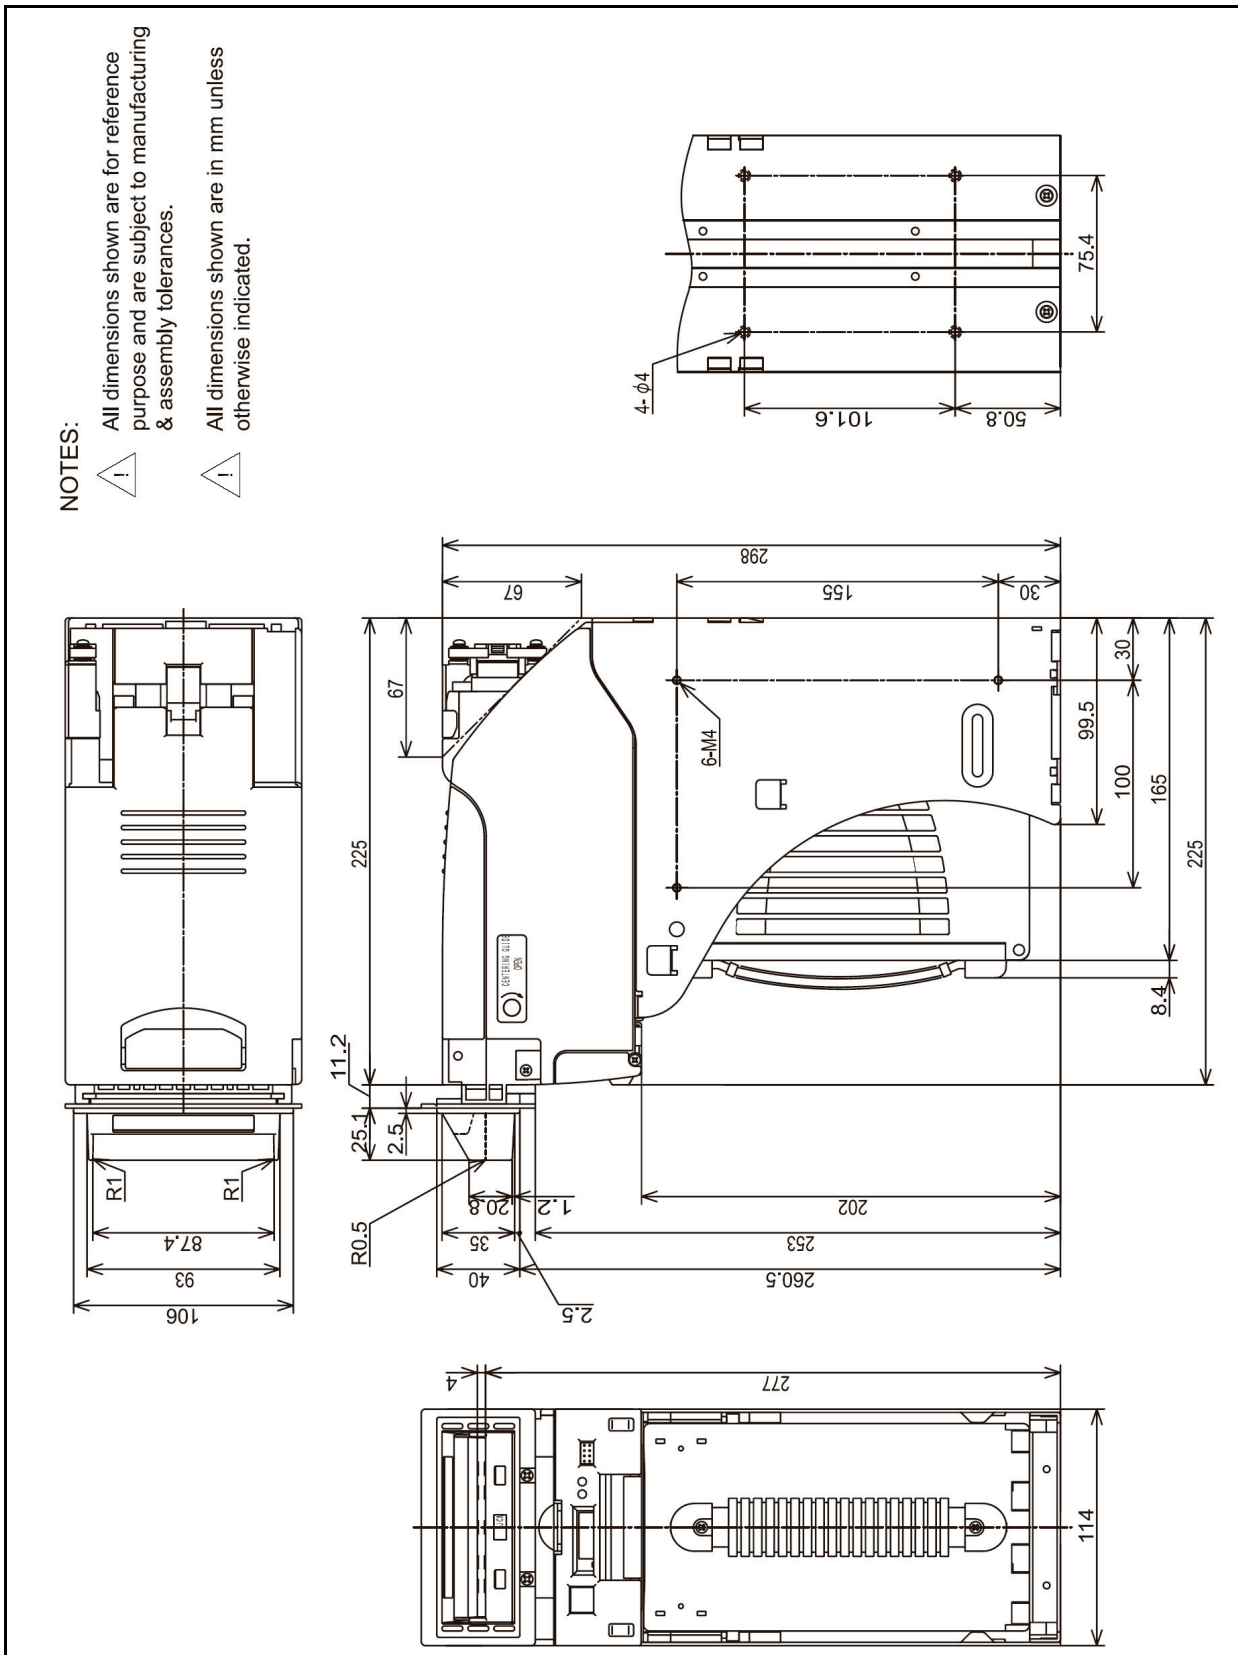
Bill Acceptor UBA-1x-SS Complete Unit Dimensions with UBA Faceplate Diagram
